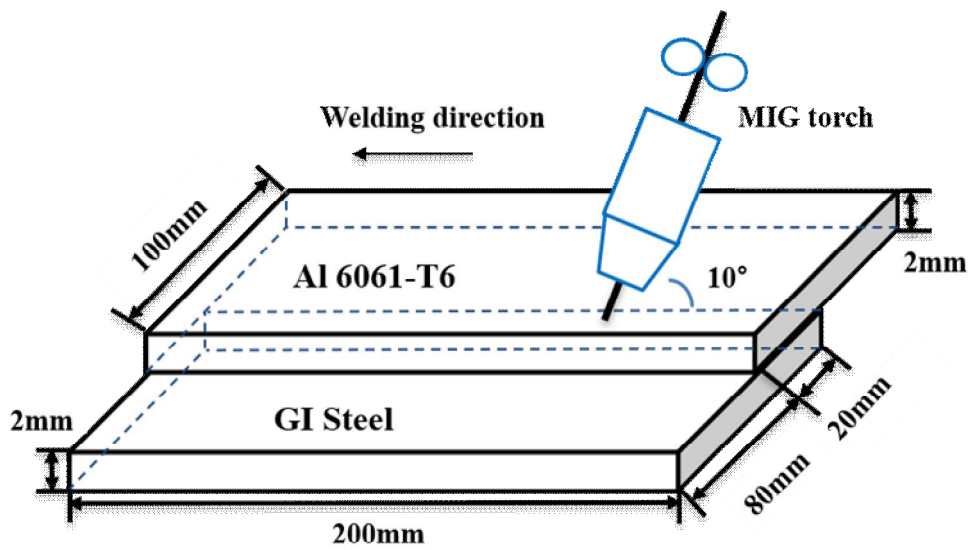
Schematic of Al6061-T6 and GI Steel welded joints specimen
